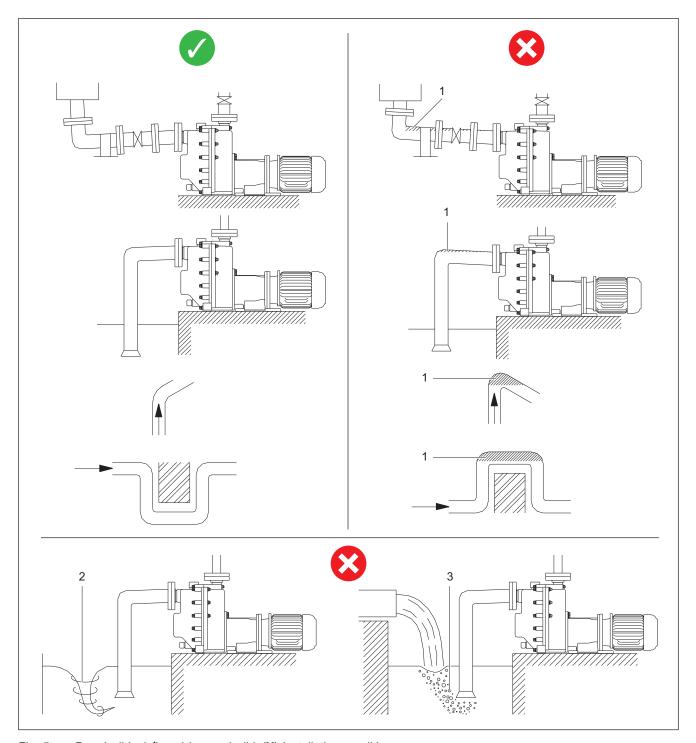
Permissible (✓) and impermissible(X) installation conditions
